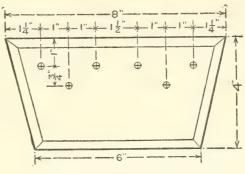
Detail of Key-Board Shown in Fig. 33.
